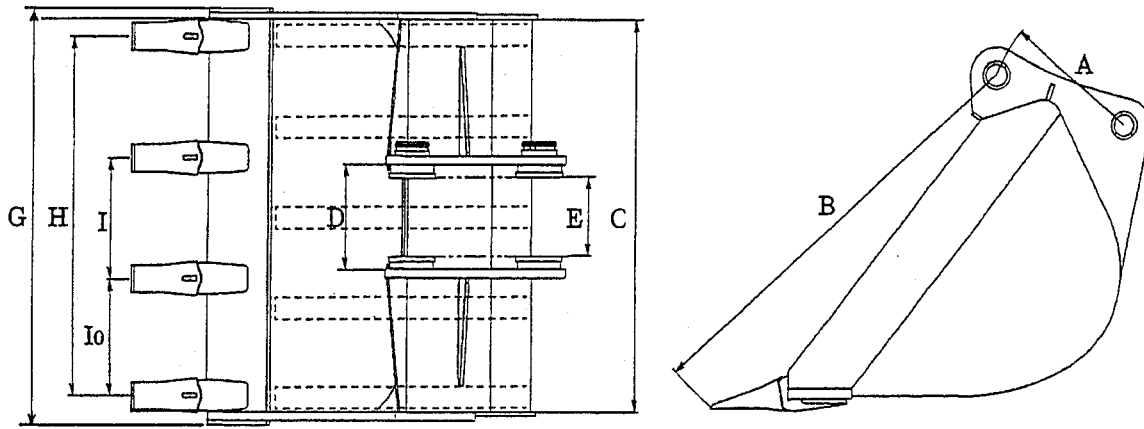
Bucket dimensional drawing (2 / 2)
